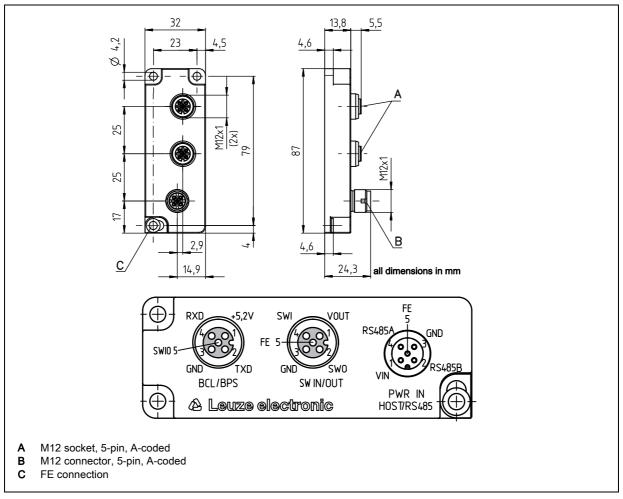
Dimensioned drawing and pin assignment of the MA 8-01/MA 8-02 connection unit
